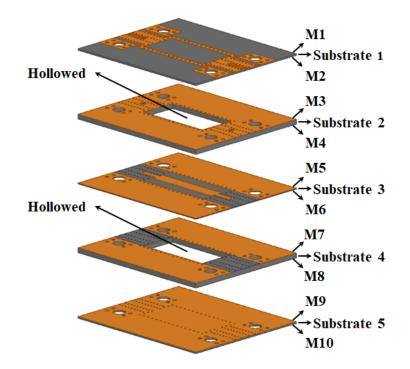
3-D exploded view of the proposed SISL technology.
